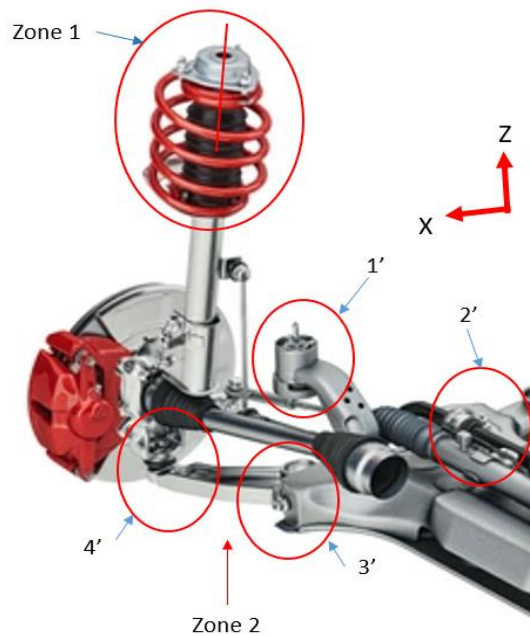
Illustration of front suspension tolerance stackup zones
